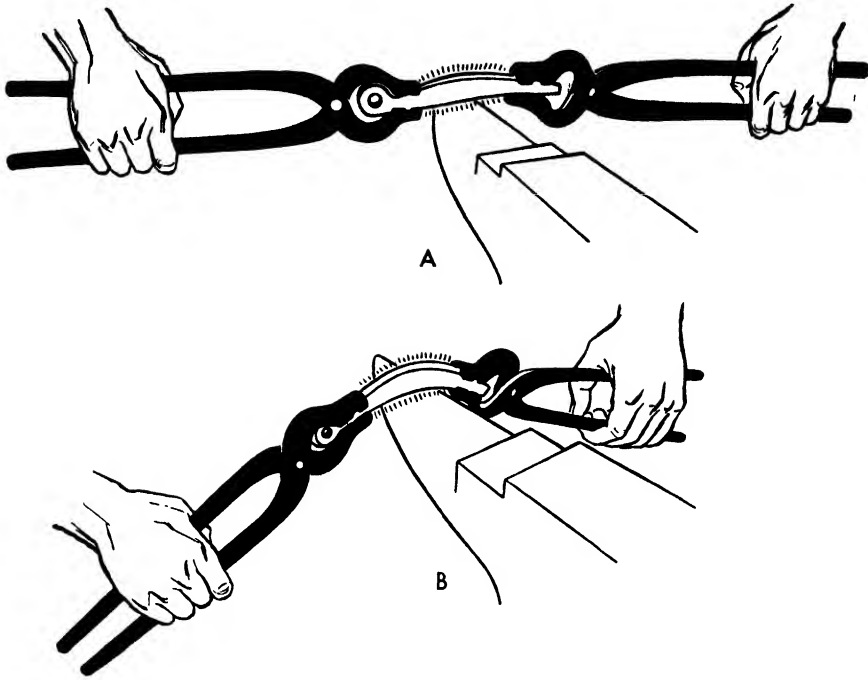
Flat iron may be bent edgewise by heating to nearly a white heat and bending slowly with tongs. This method is good in making flat chain hooks.
